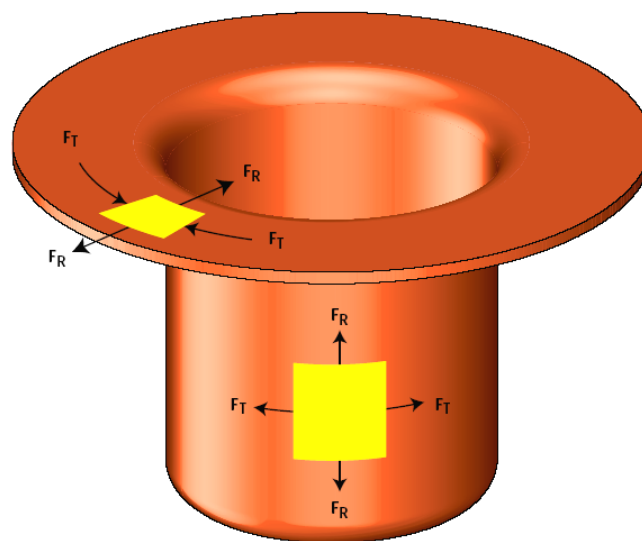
Pressing forces in deep drawing of a round cup with a blank holder (Schuler Metal Forming Handbook, 1998)
